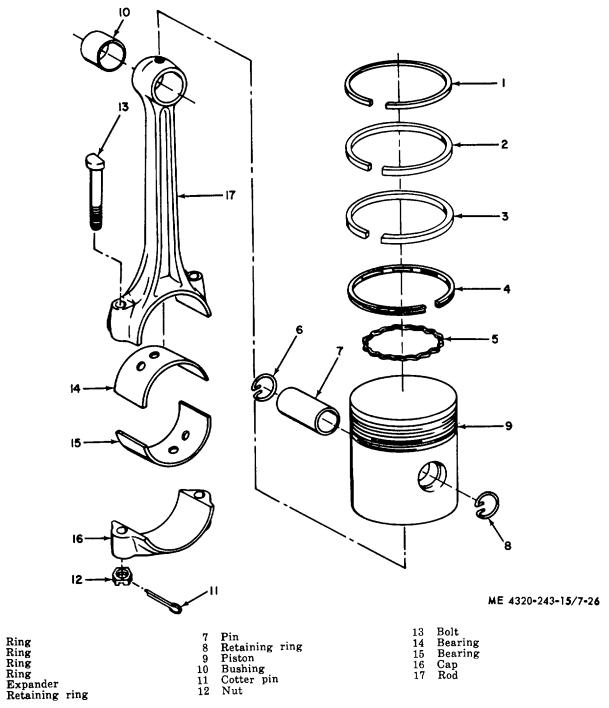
Piston, rings and connecting rod assembly, assembly and disassembly.
